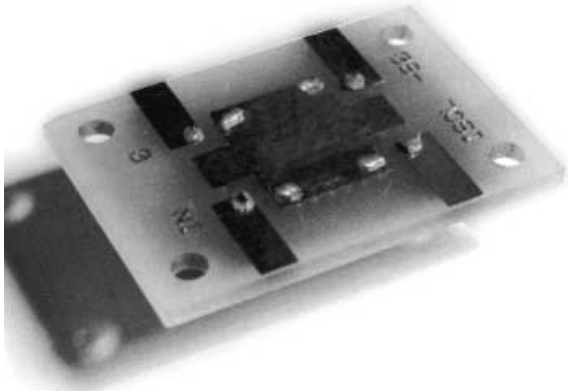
Manual Solder Paste Deposit on Test Circuit
